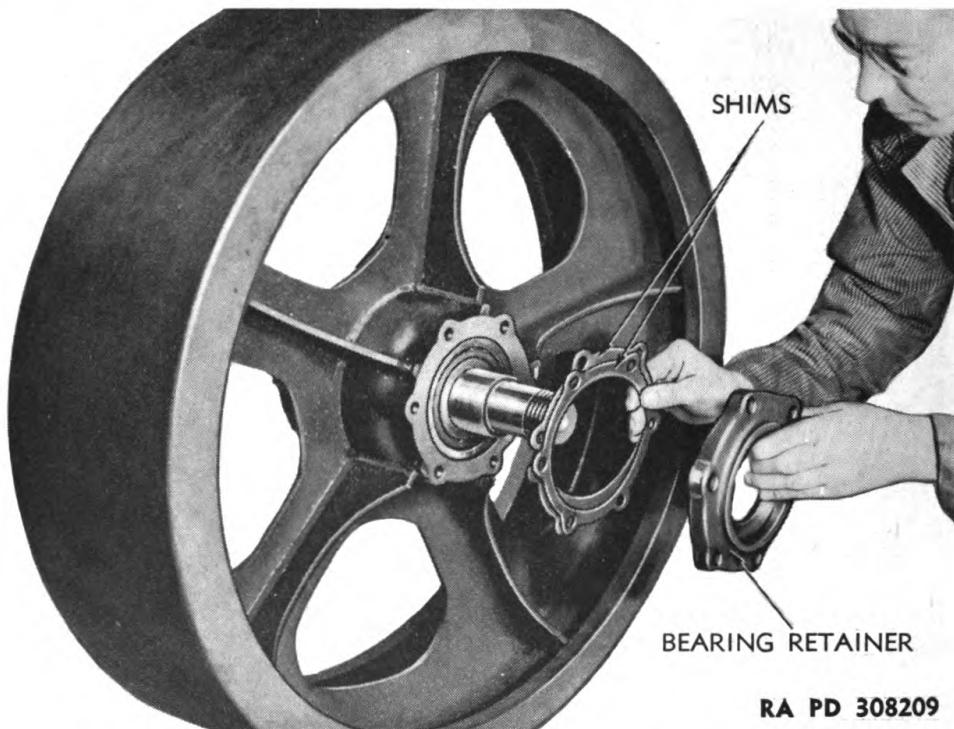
Installing Oil Seal Plate in Bearing Retainer
